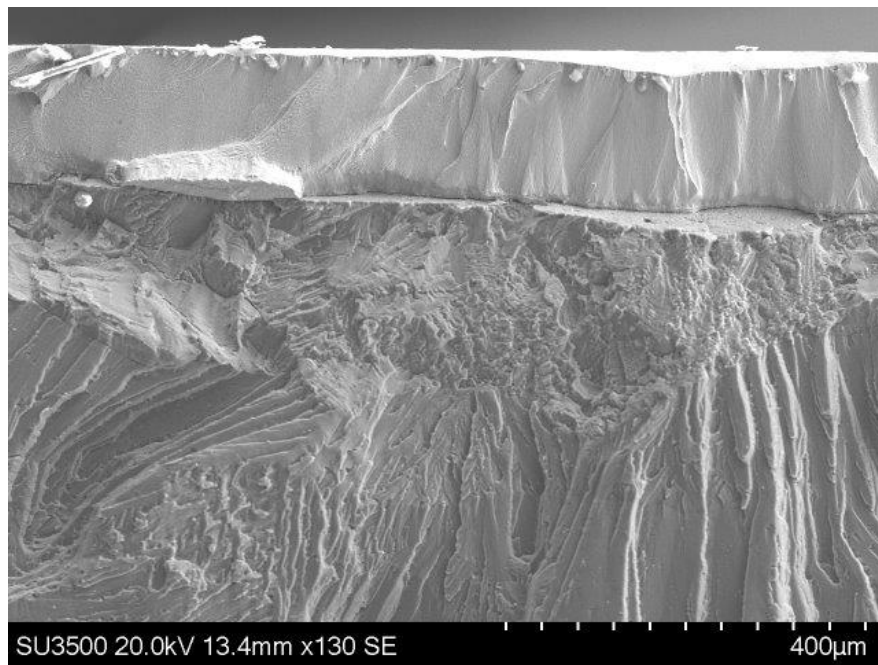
Location B' on the fracture surface of Specimen H1.
